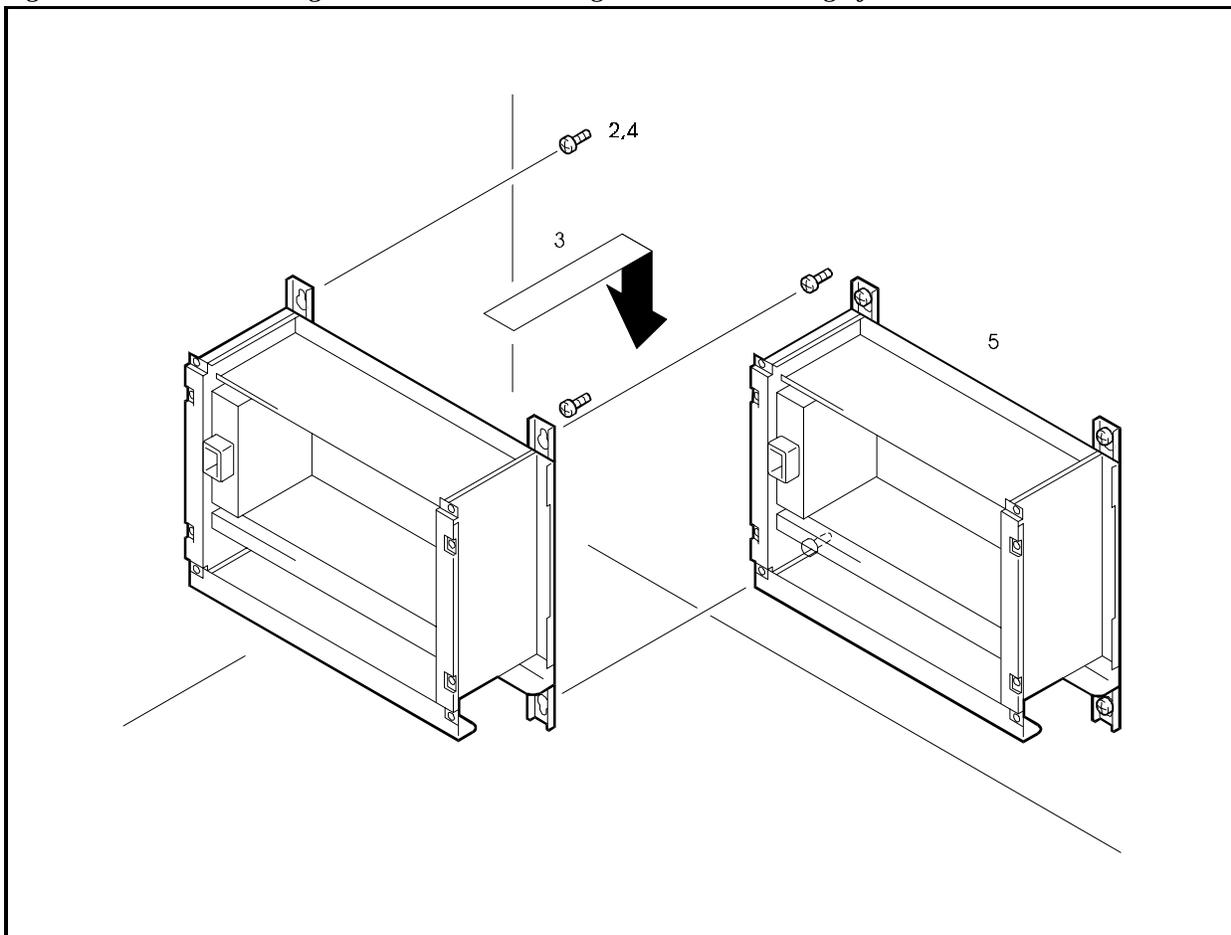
Wall-mounting Installation: Attaching the Wall-mounting Bracket
